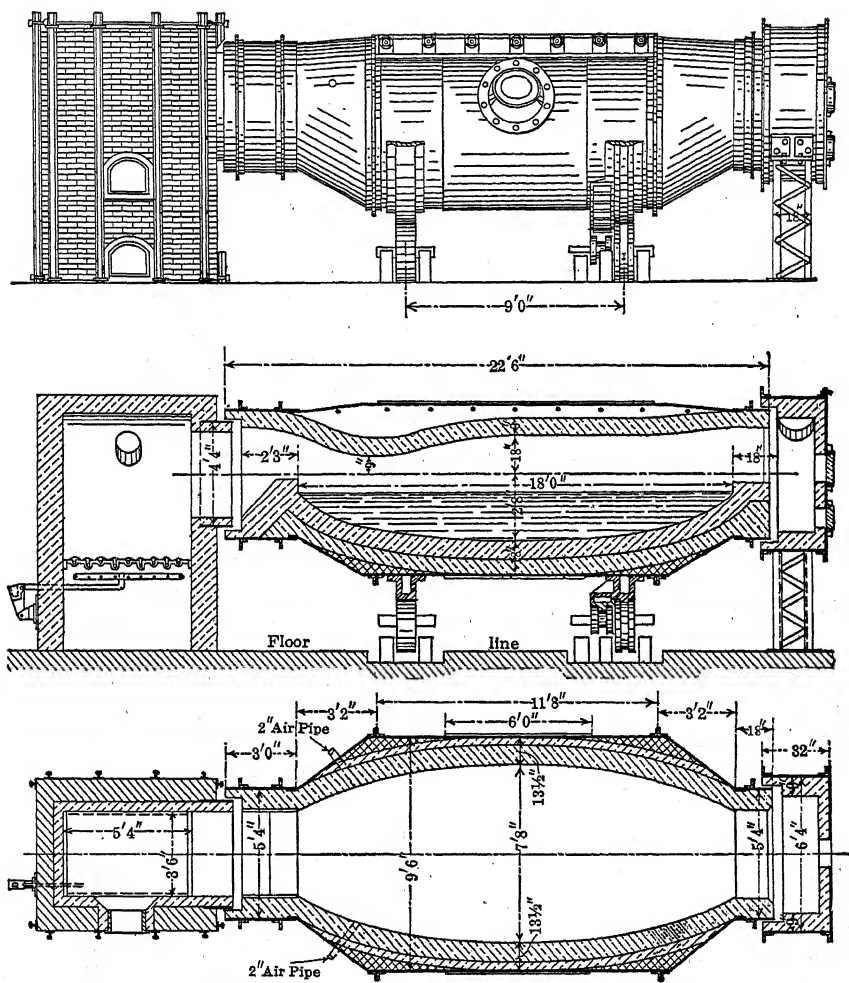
ELEVATION AND SECTIONS OF THE SECOND TILTING FURNACE OF THE ANACONDA COPPER MINING CO.
